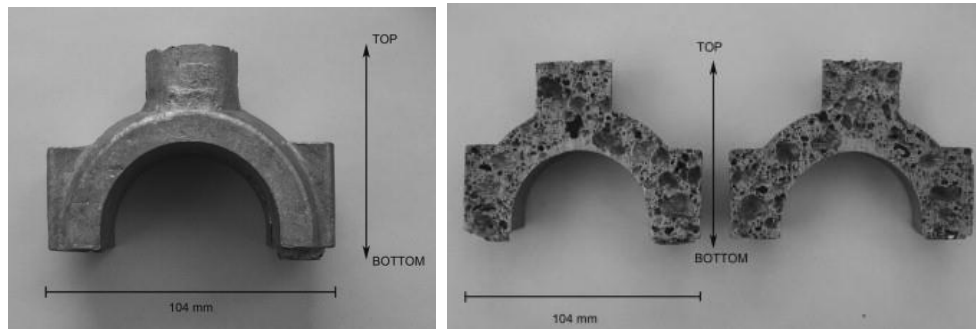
Castings produced by METCOMB method and view of the obtained filler structure [17]
